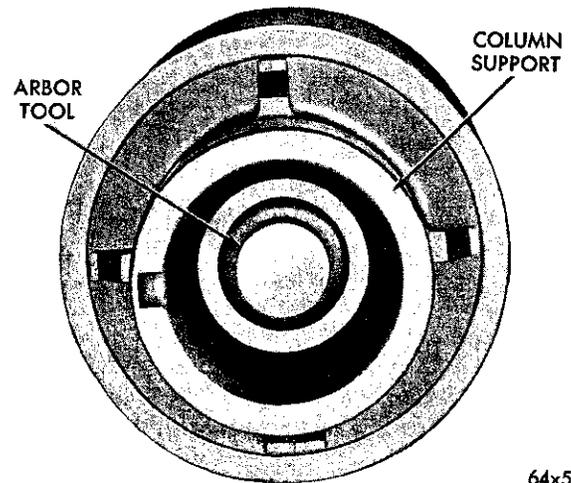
Retaining the Bearing Rollers with Arbor Tool
